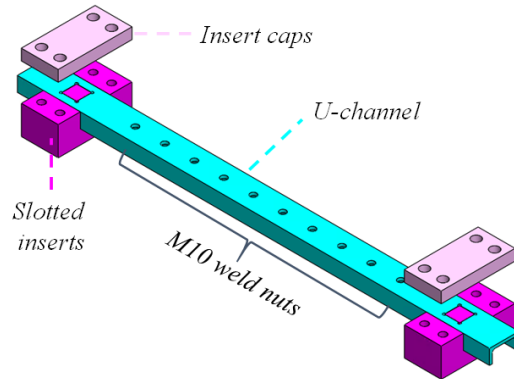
Placement of the U-channel on the slotted inserts. The U-channel is secured in the slotted inserts with the insert caps using M14 bolts. Underneath the U-channel, M10 nuts were welded where the B-pillar is bolted on top of the U-channel.
